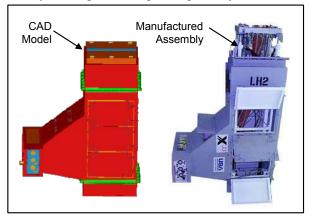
X-33 LH2 Umbilical Assembly CAD Model and Manufactured Assembly
